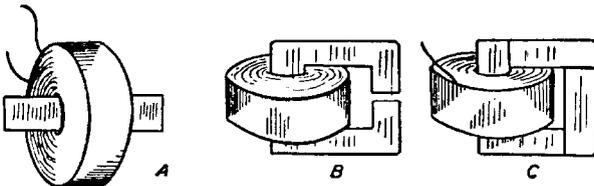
Construction of Iron-Core Inductance or Choke Coil
